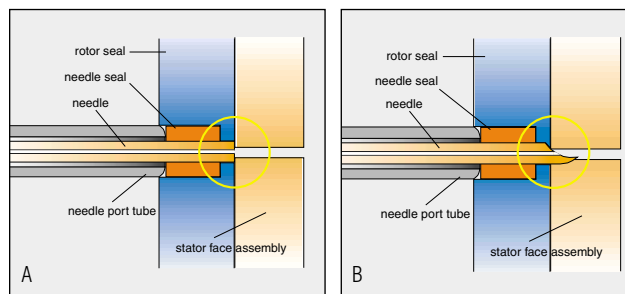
A square cut needle (A) stops against the stator face assembly. The tip of a pointed needle (B) slips into the stator face and the tip breaks off as the valve rotates.
